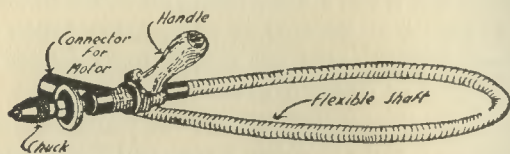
THE WARD FLEXIBLE SHAFT UNIT
